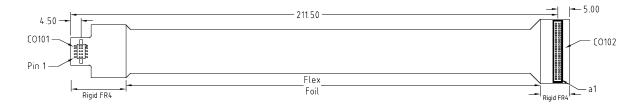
ETAL6 Rev. A, Rev. B Bottom View
